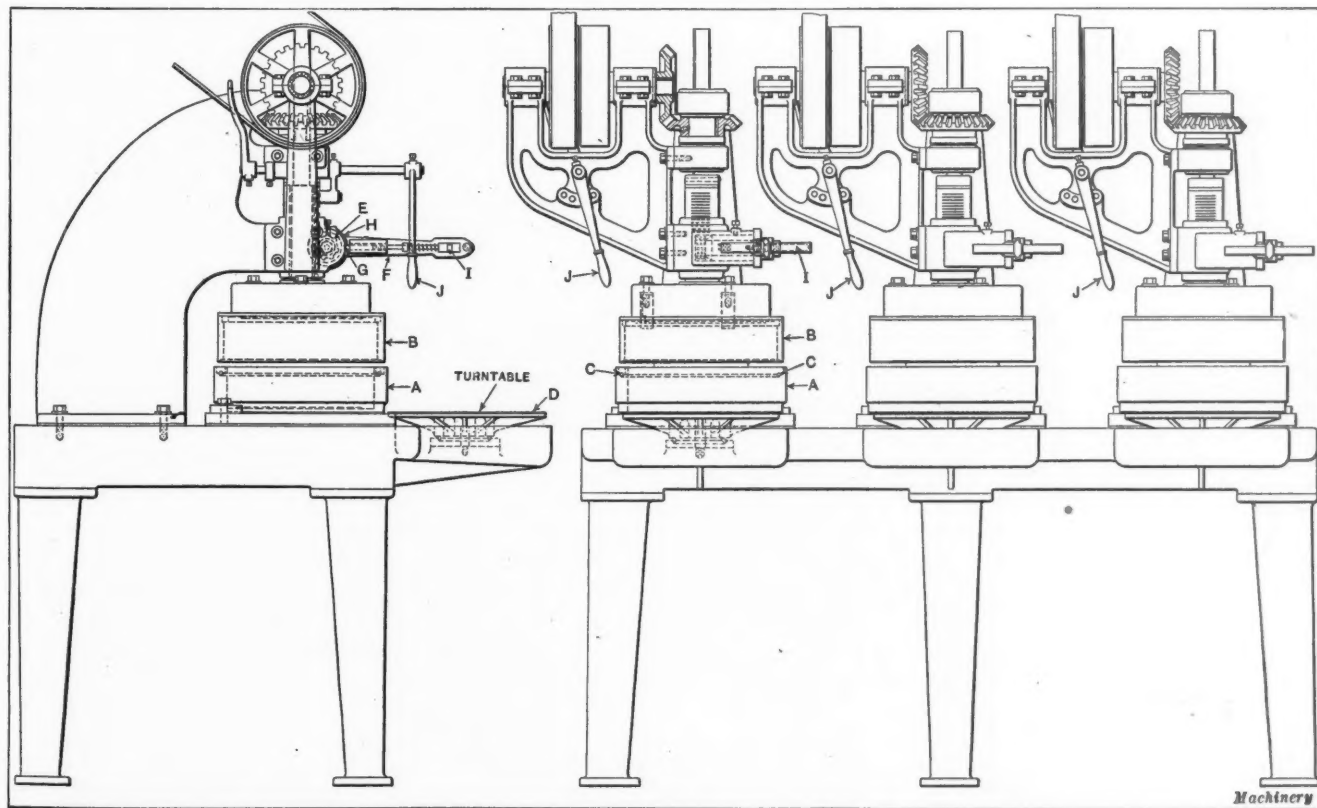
Side and Front Views of Oil-grinding Machine, illustrating Method of Operation
